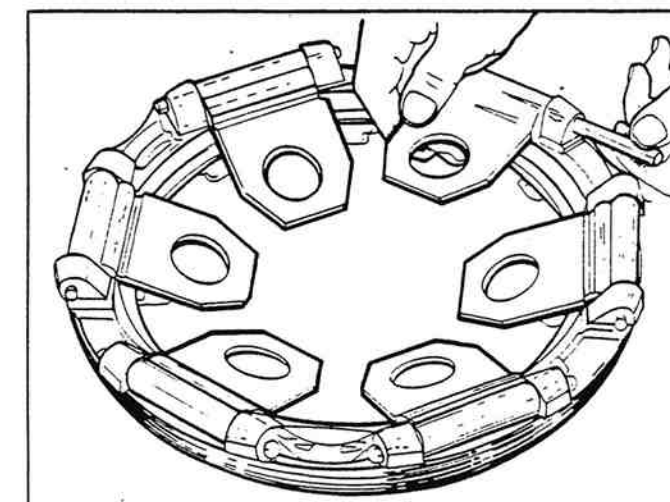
Remove Retainer Clips, Pins and Levers.
